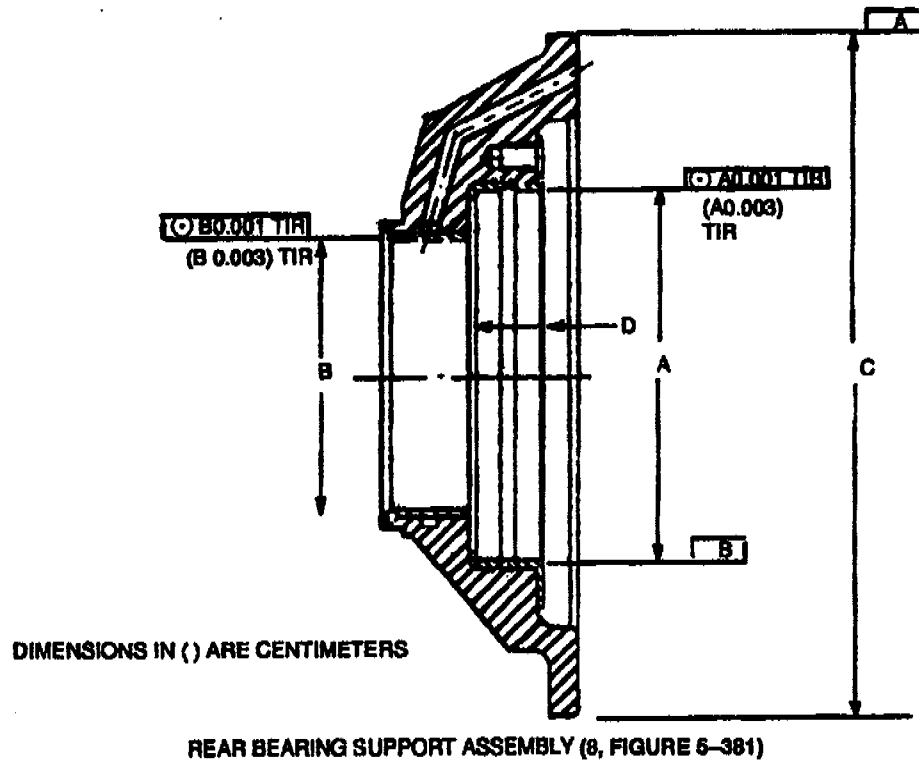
Propeller Shaft Rear Bearing Support Assembly Dimensional Inspection Locations.
